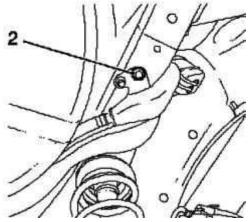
Mounting cable parking brake system: 1 - mount
